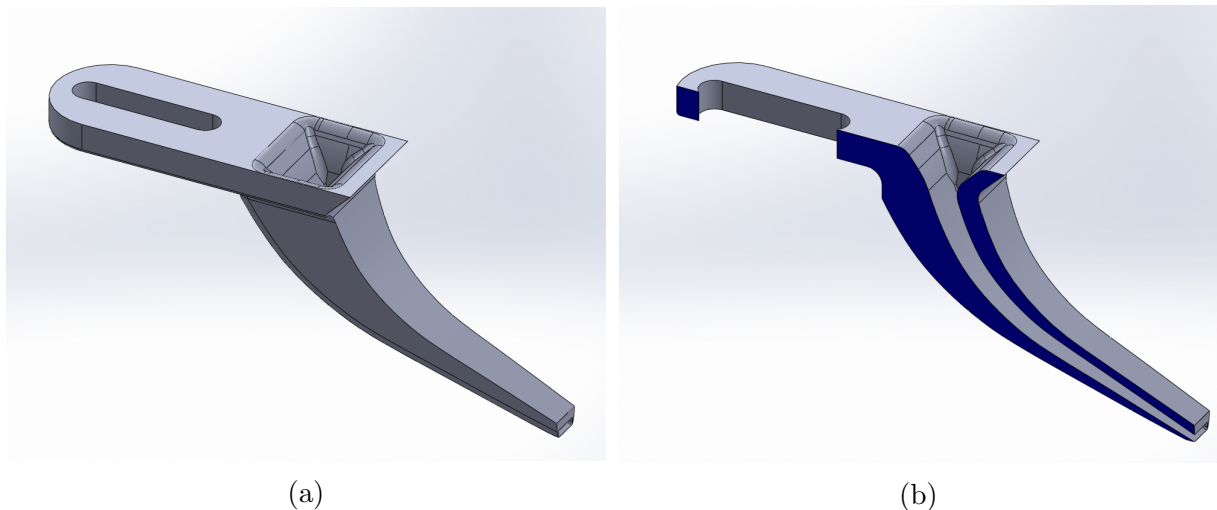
Additive manufacturing feed nozzle version three; (a)full view (b) section view.
